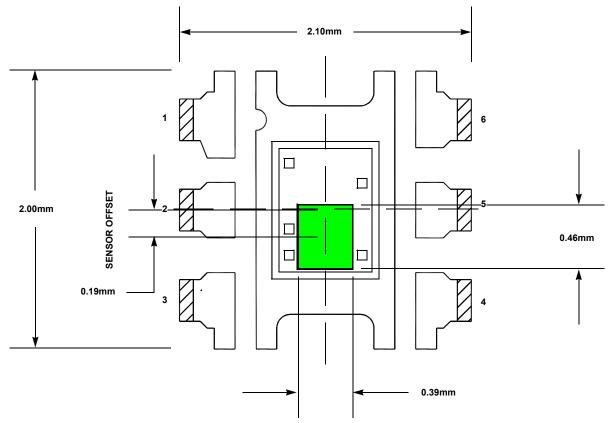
6 LD ODFN SENSOR LOCATION OUTLINE
